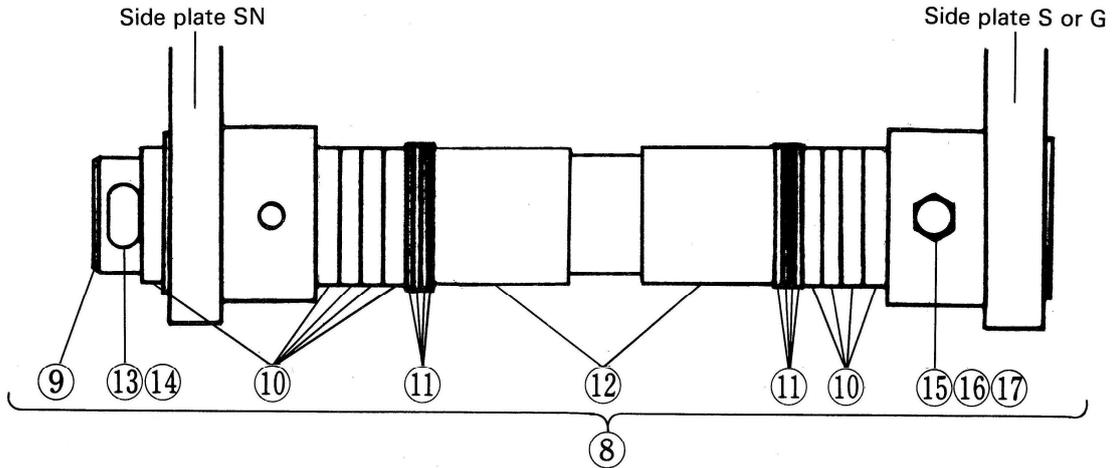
Suspension shaft W30 assembly. (5 t)
